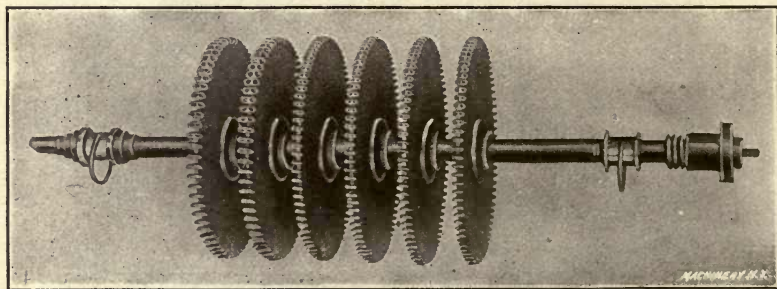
Shaft of the Kerr Turbine, with Six Disks
